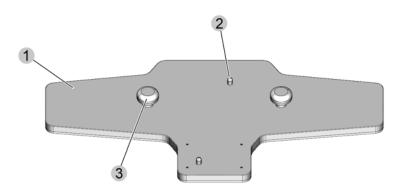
Contact plate for 1 pellet station at position 5 (dosing unit 2)
